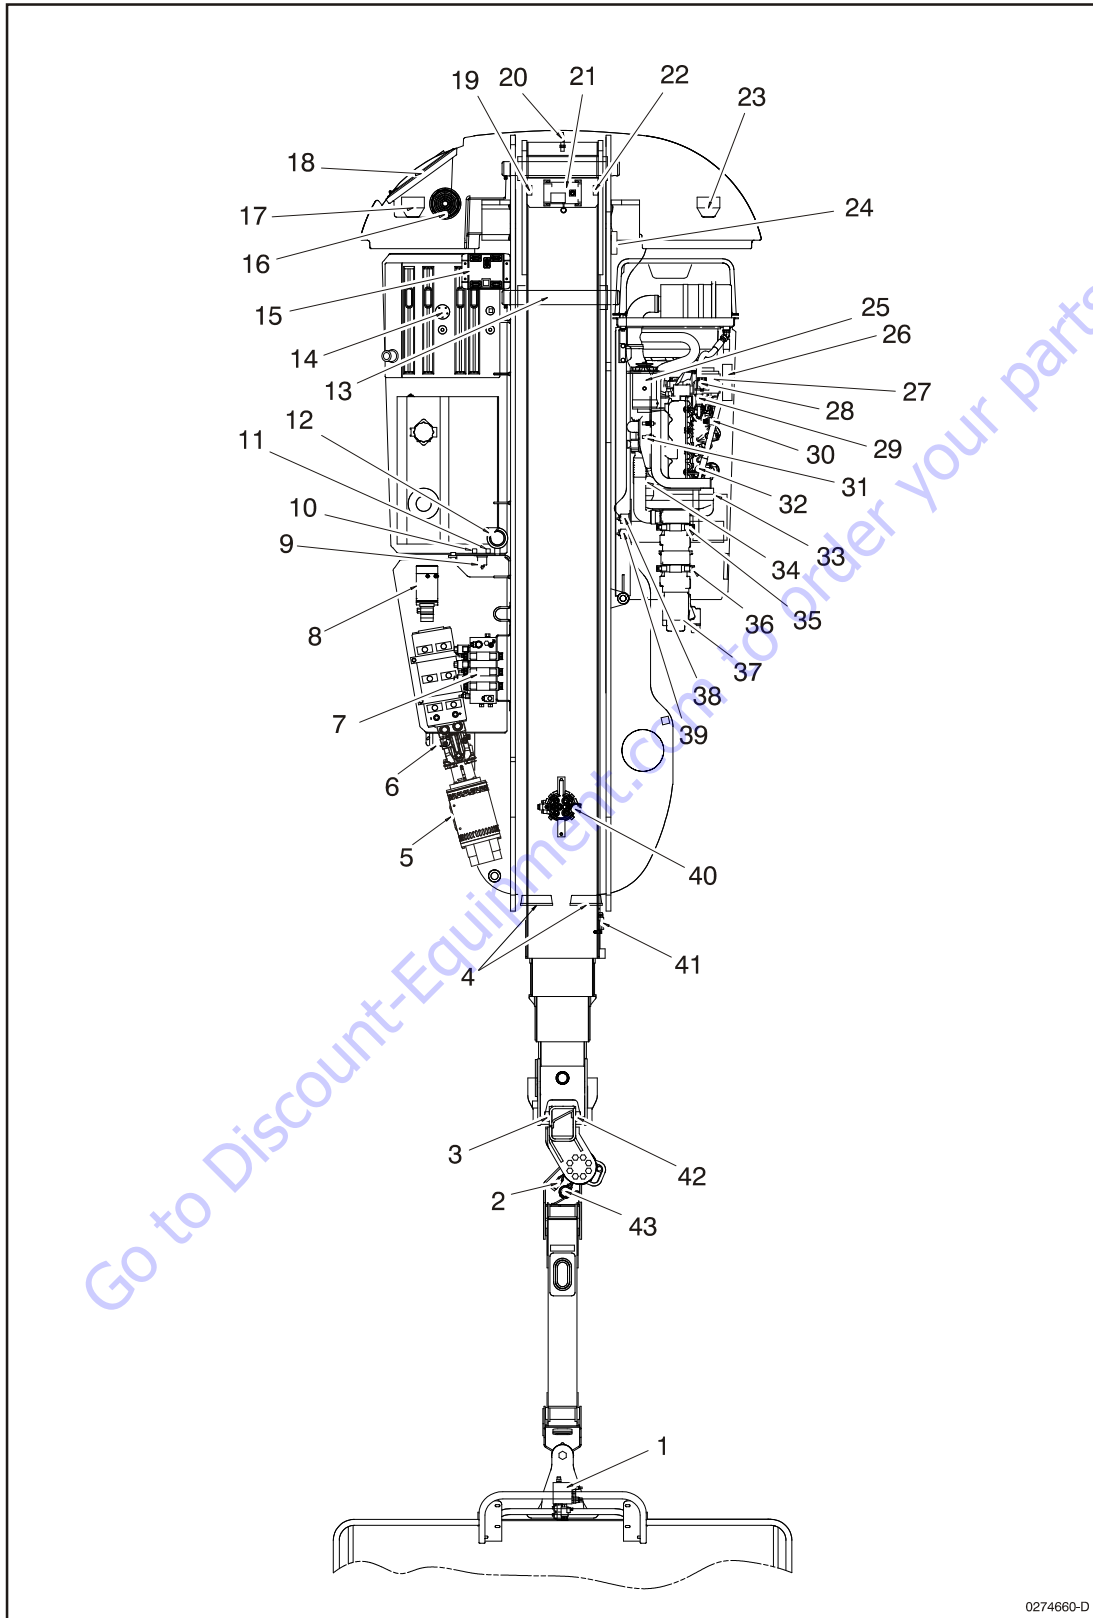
Turntable and Boom Component Location - Sheet 1 of 2
